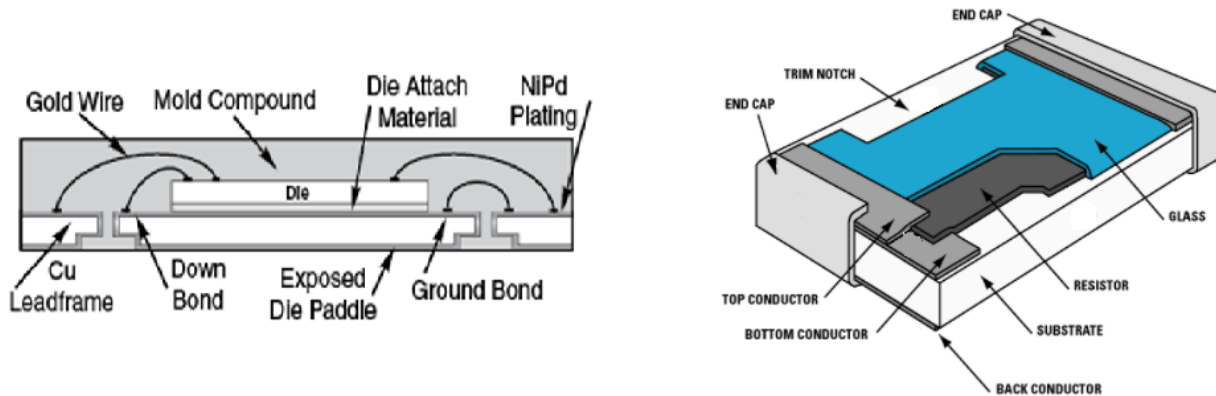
Cross-section view of leadless packages a) Micro Lead Frame (MLF) package [16], b) Surface Mount Resistor (SMR) [17]
